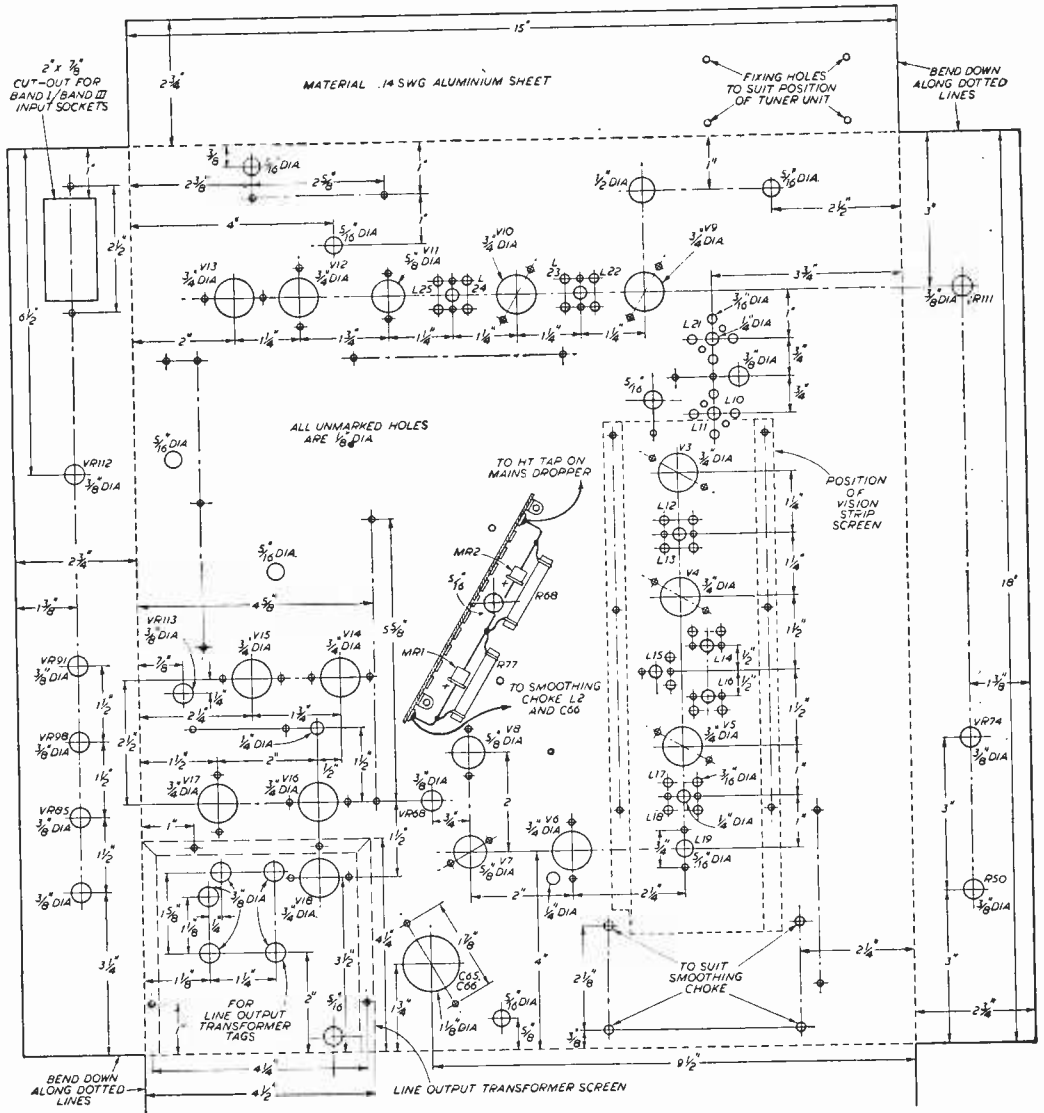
Drilling details of the chassis, viewed from above (dimensions of the interstage and vision I.F. screens will be given next month together with hole spacings for the I.F. transformer).
